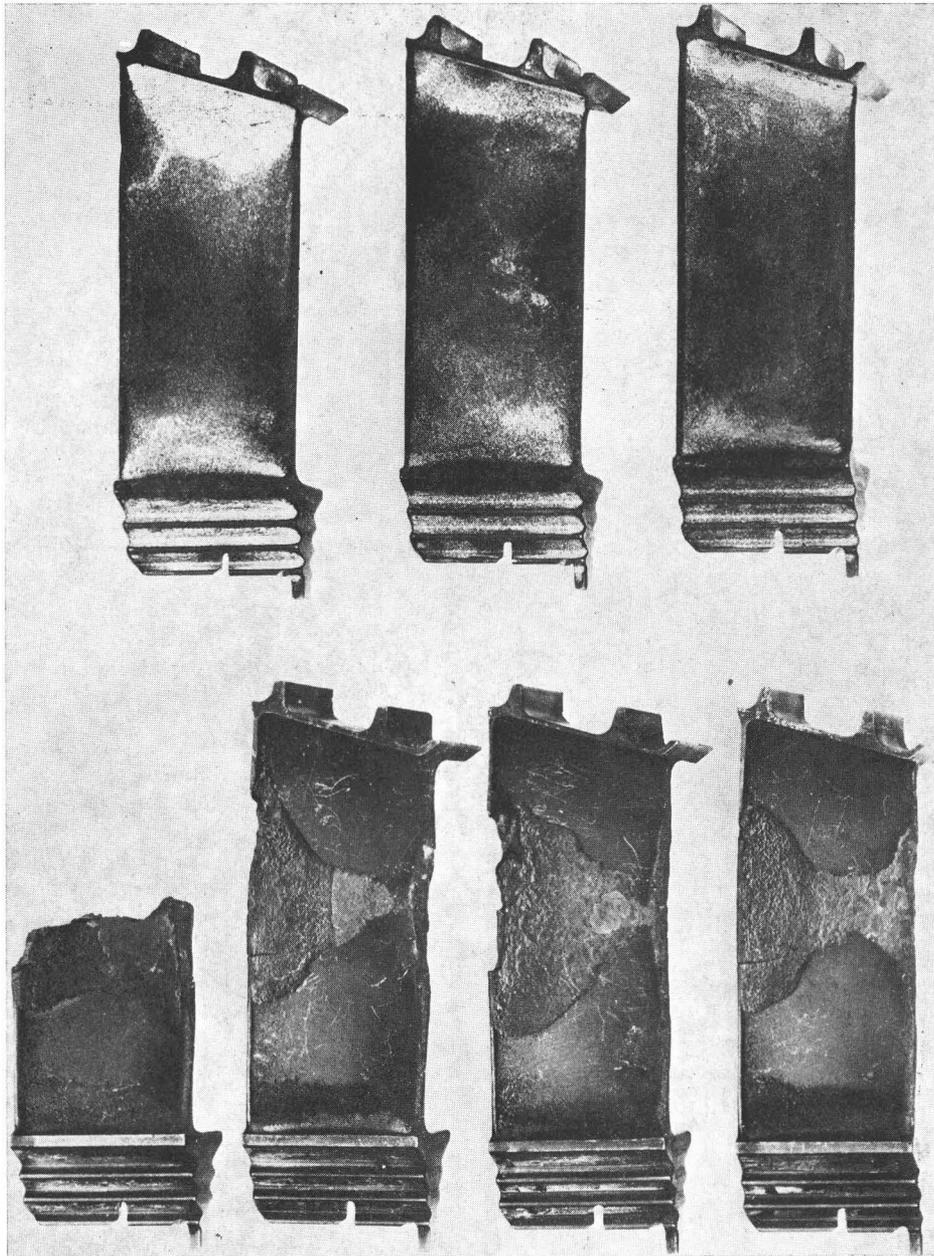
Bottom row: Uncoated turbine rotor blades from marine service showing severe salt corrosion attack. Top row: Unattacked aluminized blades at the same life.
